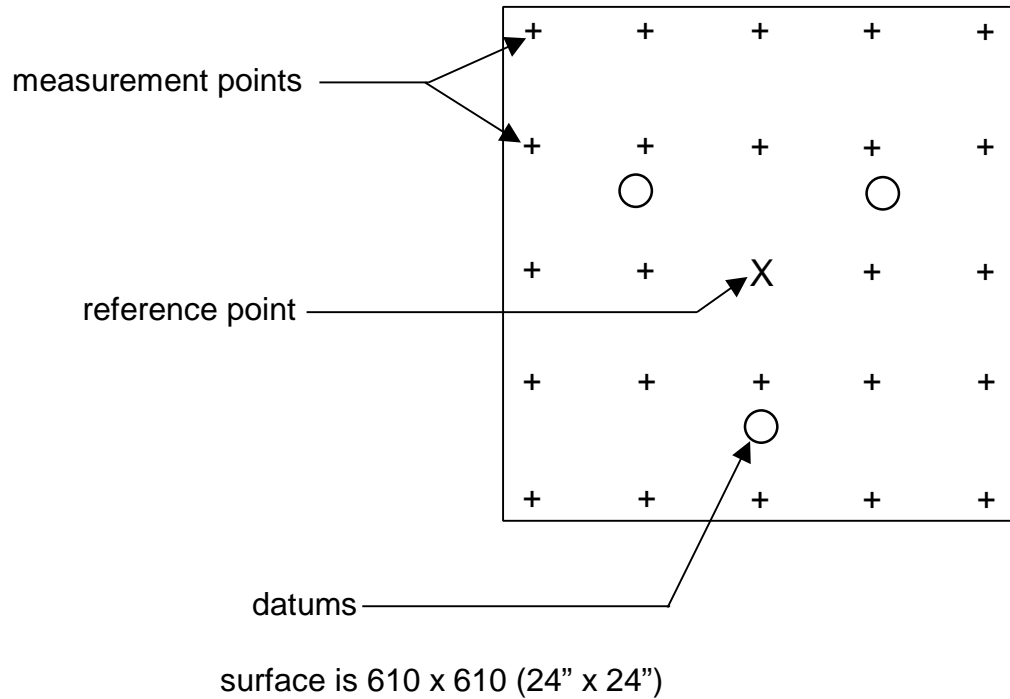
Relative locations of the significant points on the weld prototype
